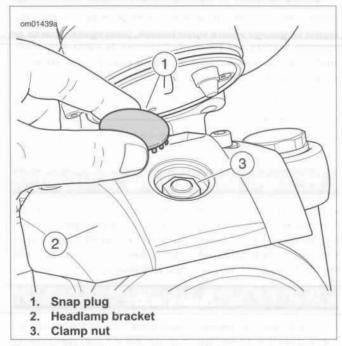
Headlamp Adjustment: XL 883R/L/N, XL 1200T
